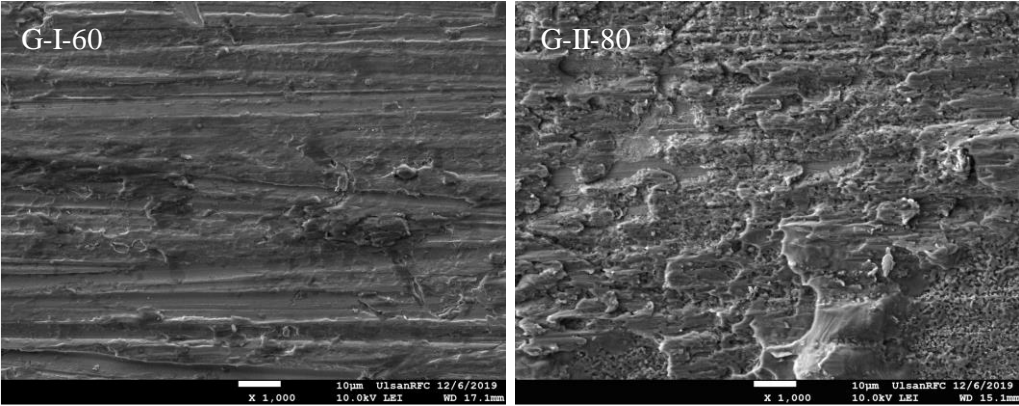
Fracture morphology of G-I-60 and G-II-80 joints.
